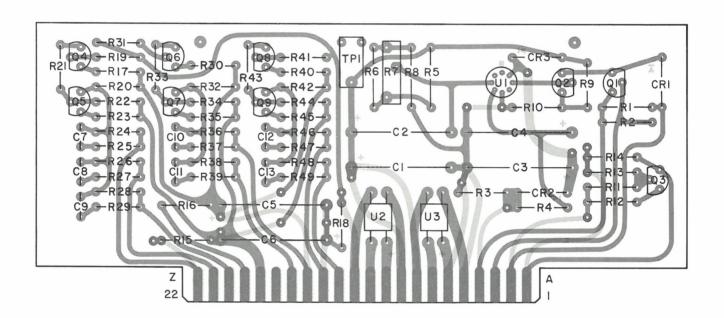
Type 76227 Power Supply and Buffer, A4A2, Component Locations
